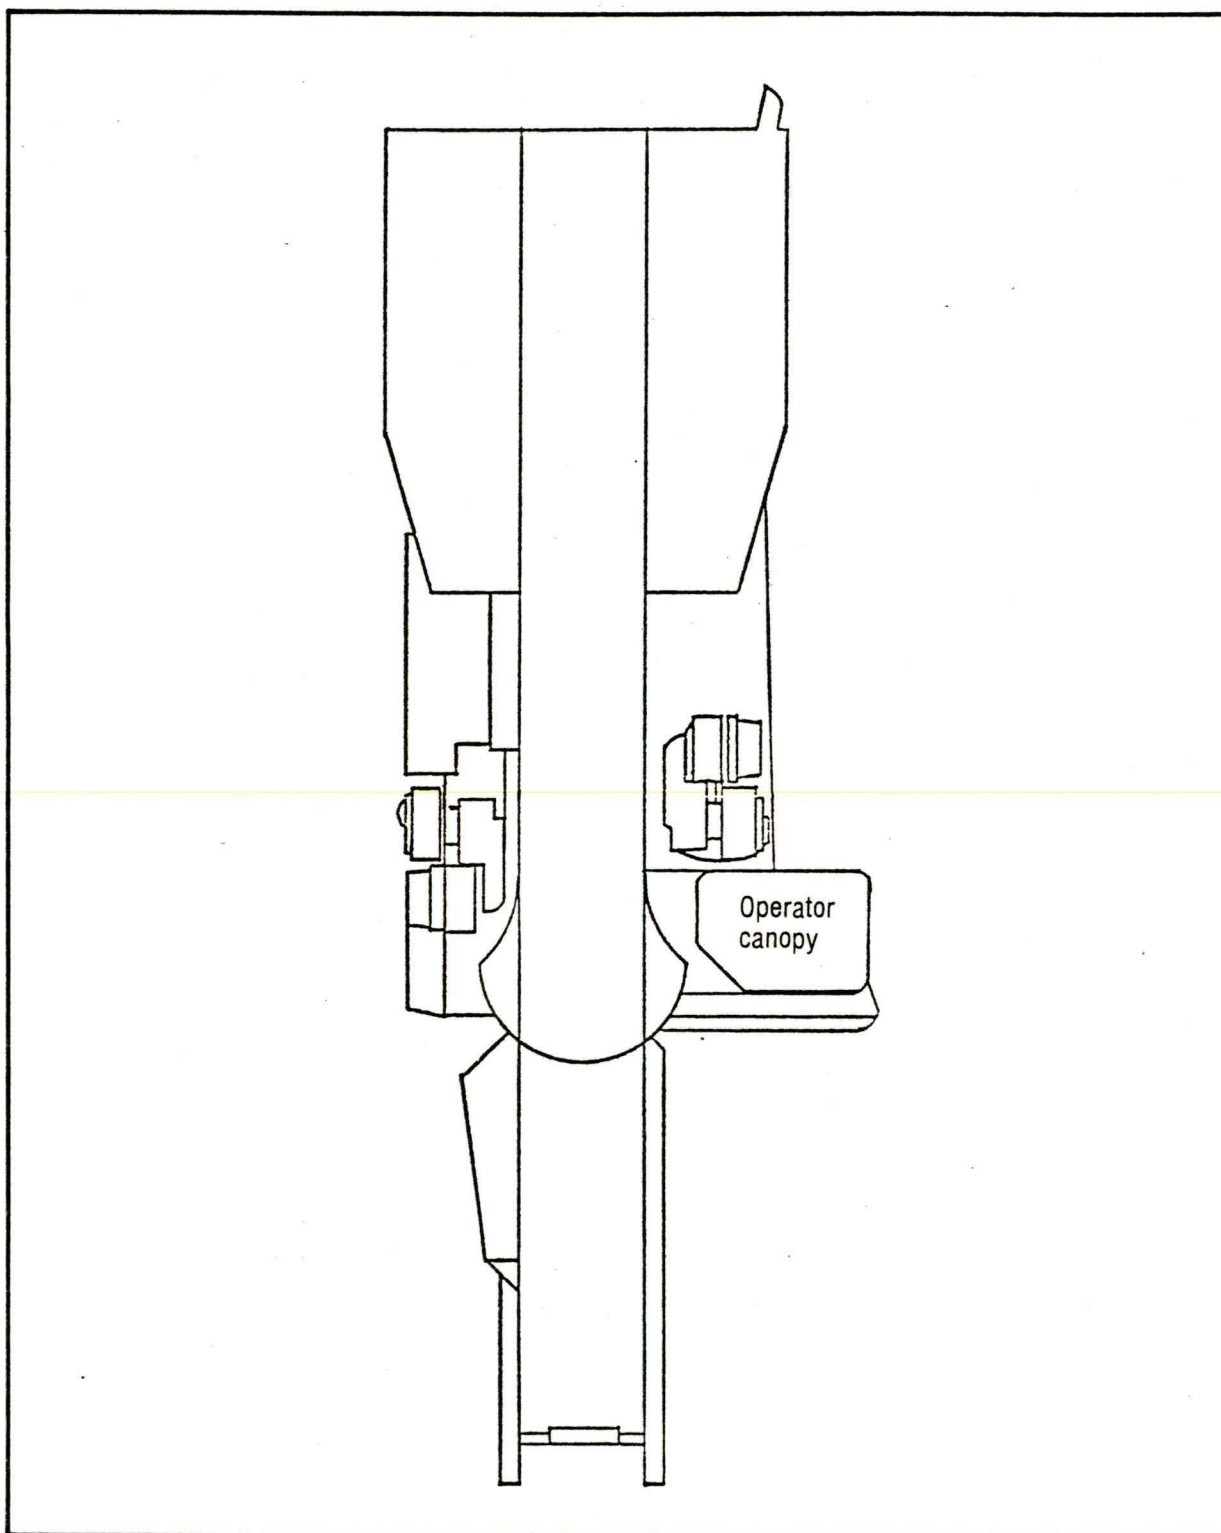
CONCEPT 5 -- MODIFIED JOY 14BU10-11B LOADER WITH CANOPY MOUNTED TO RIGHT REAR CHASSIS CORNER. RIGHT TRAM MOTOR AND GEARBOX REPLACED WITH LEFT UNIT.
